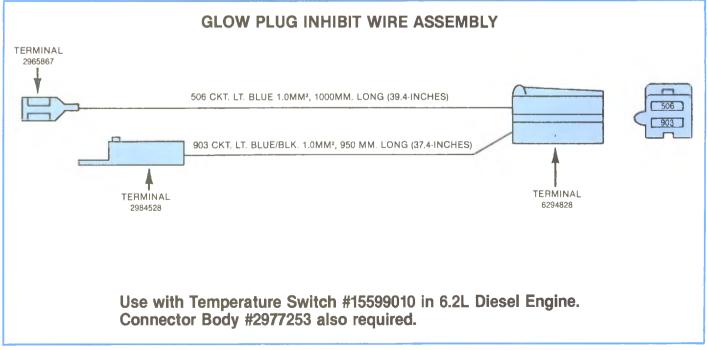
, Glow Plug Inhibit Wire Assembly.
